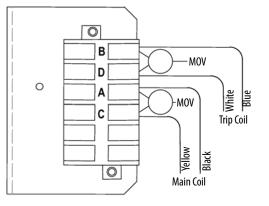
Terminal Block Assembly (Mechanically Latched Electromechanical Relay Controlled Contactor)
